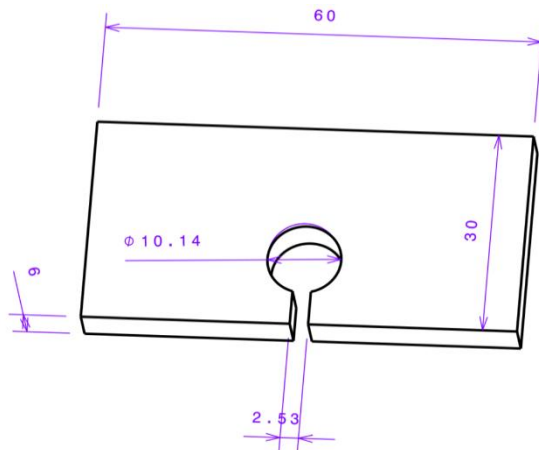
Geometry and dimensions of Keyhole-grooved sample
